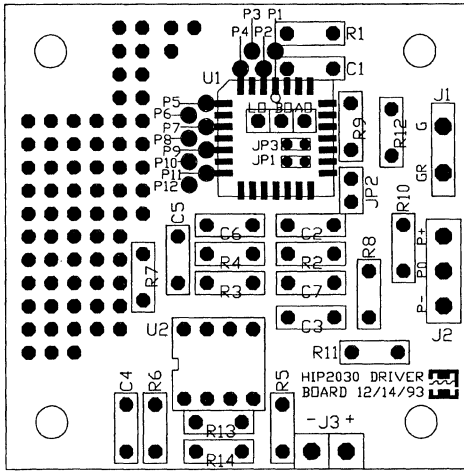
A. HIP2030 ASSEMBLY LAYER
